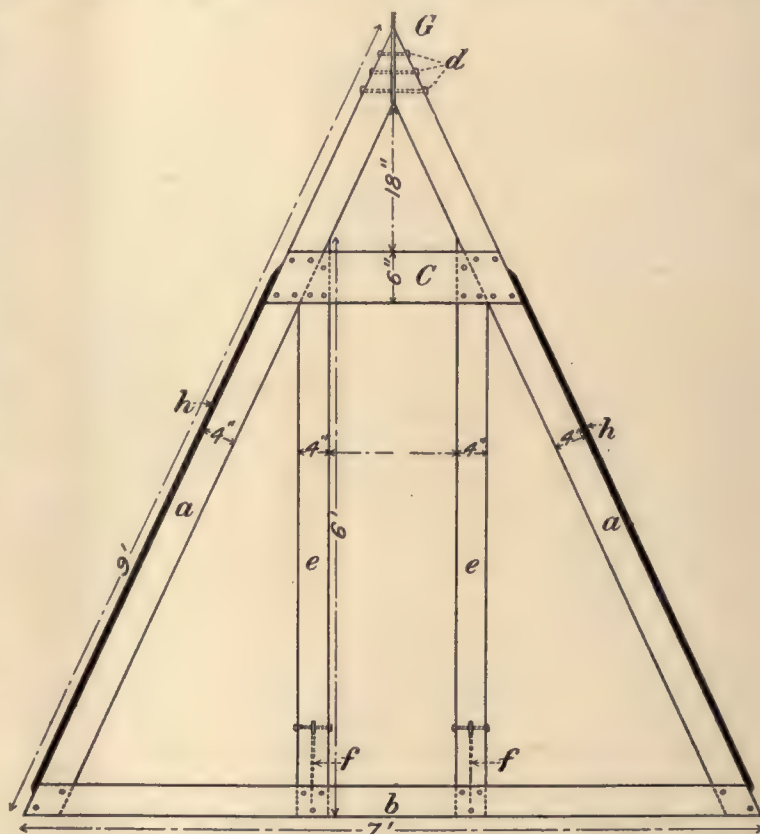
The V-shaped Cotton Stalk Cutter, Top View.
